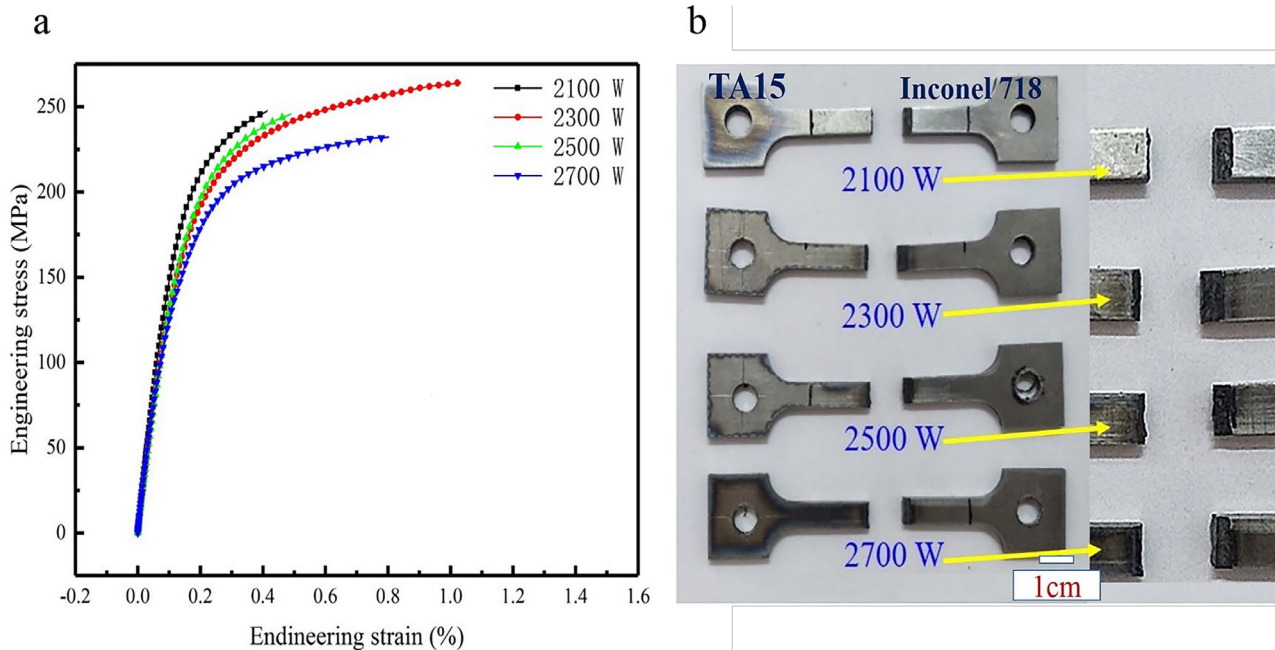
a) the stress-strain curve of the welding joints tensile test, b) the macroscopic fracture morphology and fracture position
